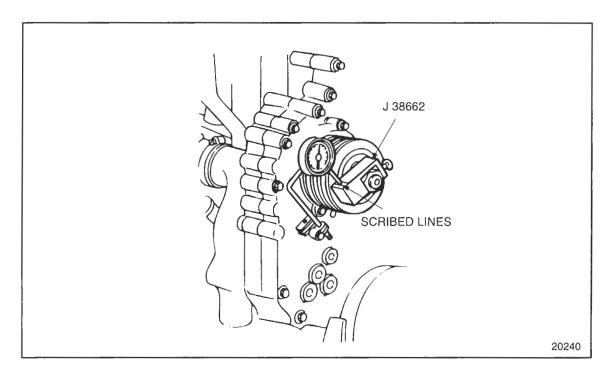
Accessory Drive Gear-to-Bull Gear Lash Measurement
